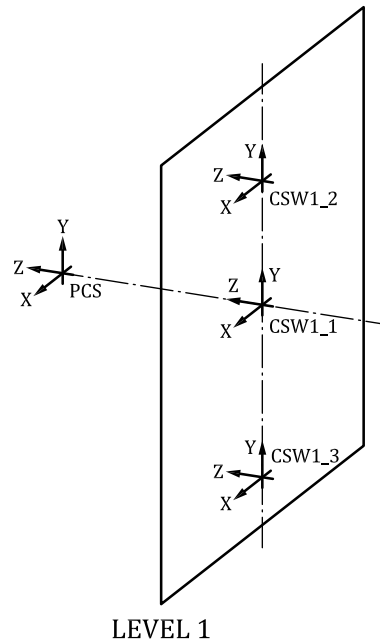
Adjustment of coordinate system at workpiece side — Linear order
